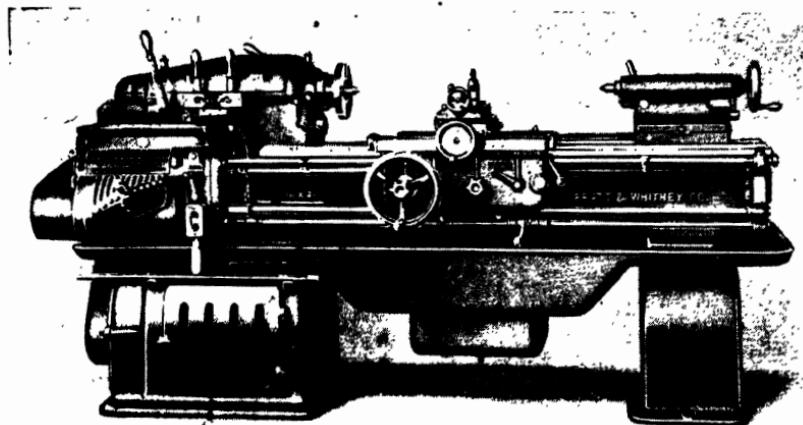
A good example of safe engine-lathe design. (*Courtesy of the Pratt & Whitney Company.*)
